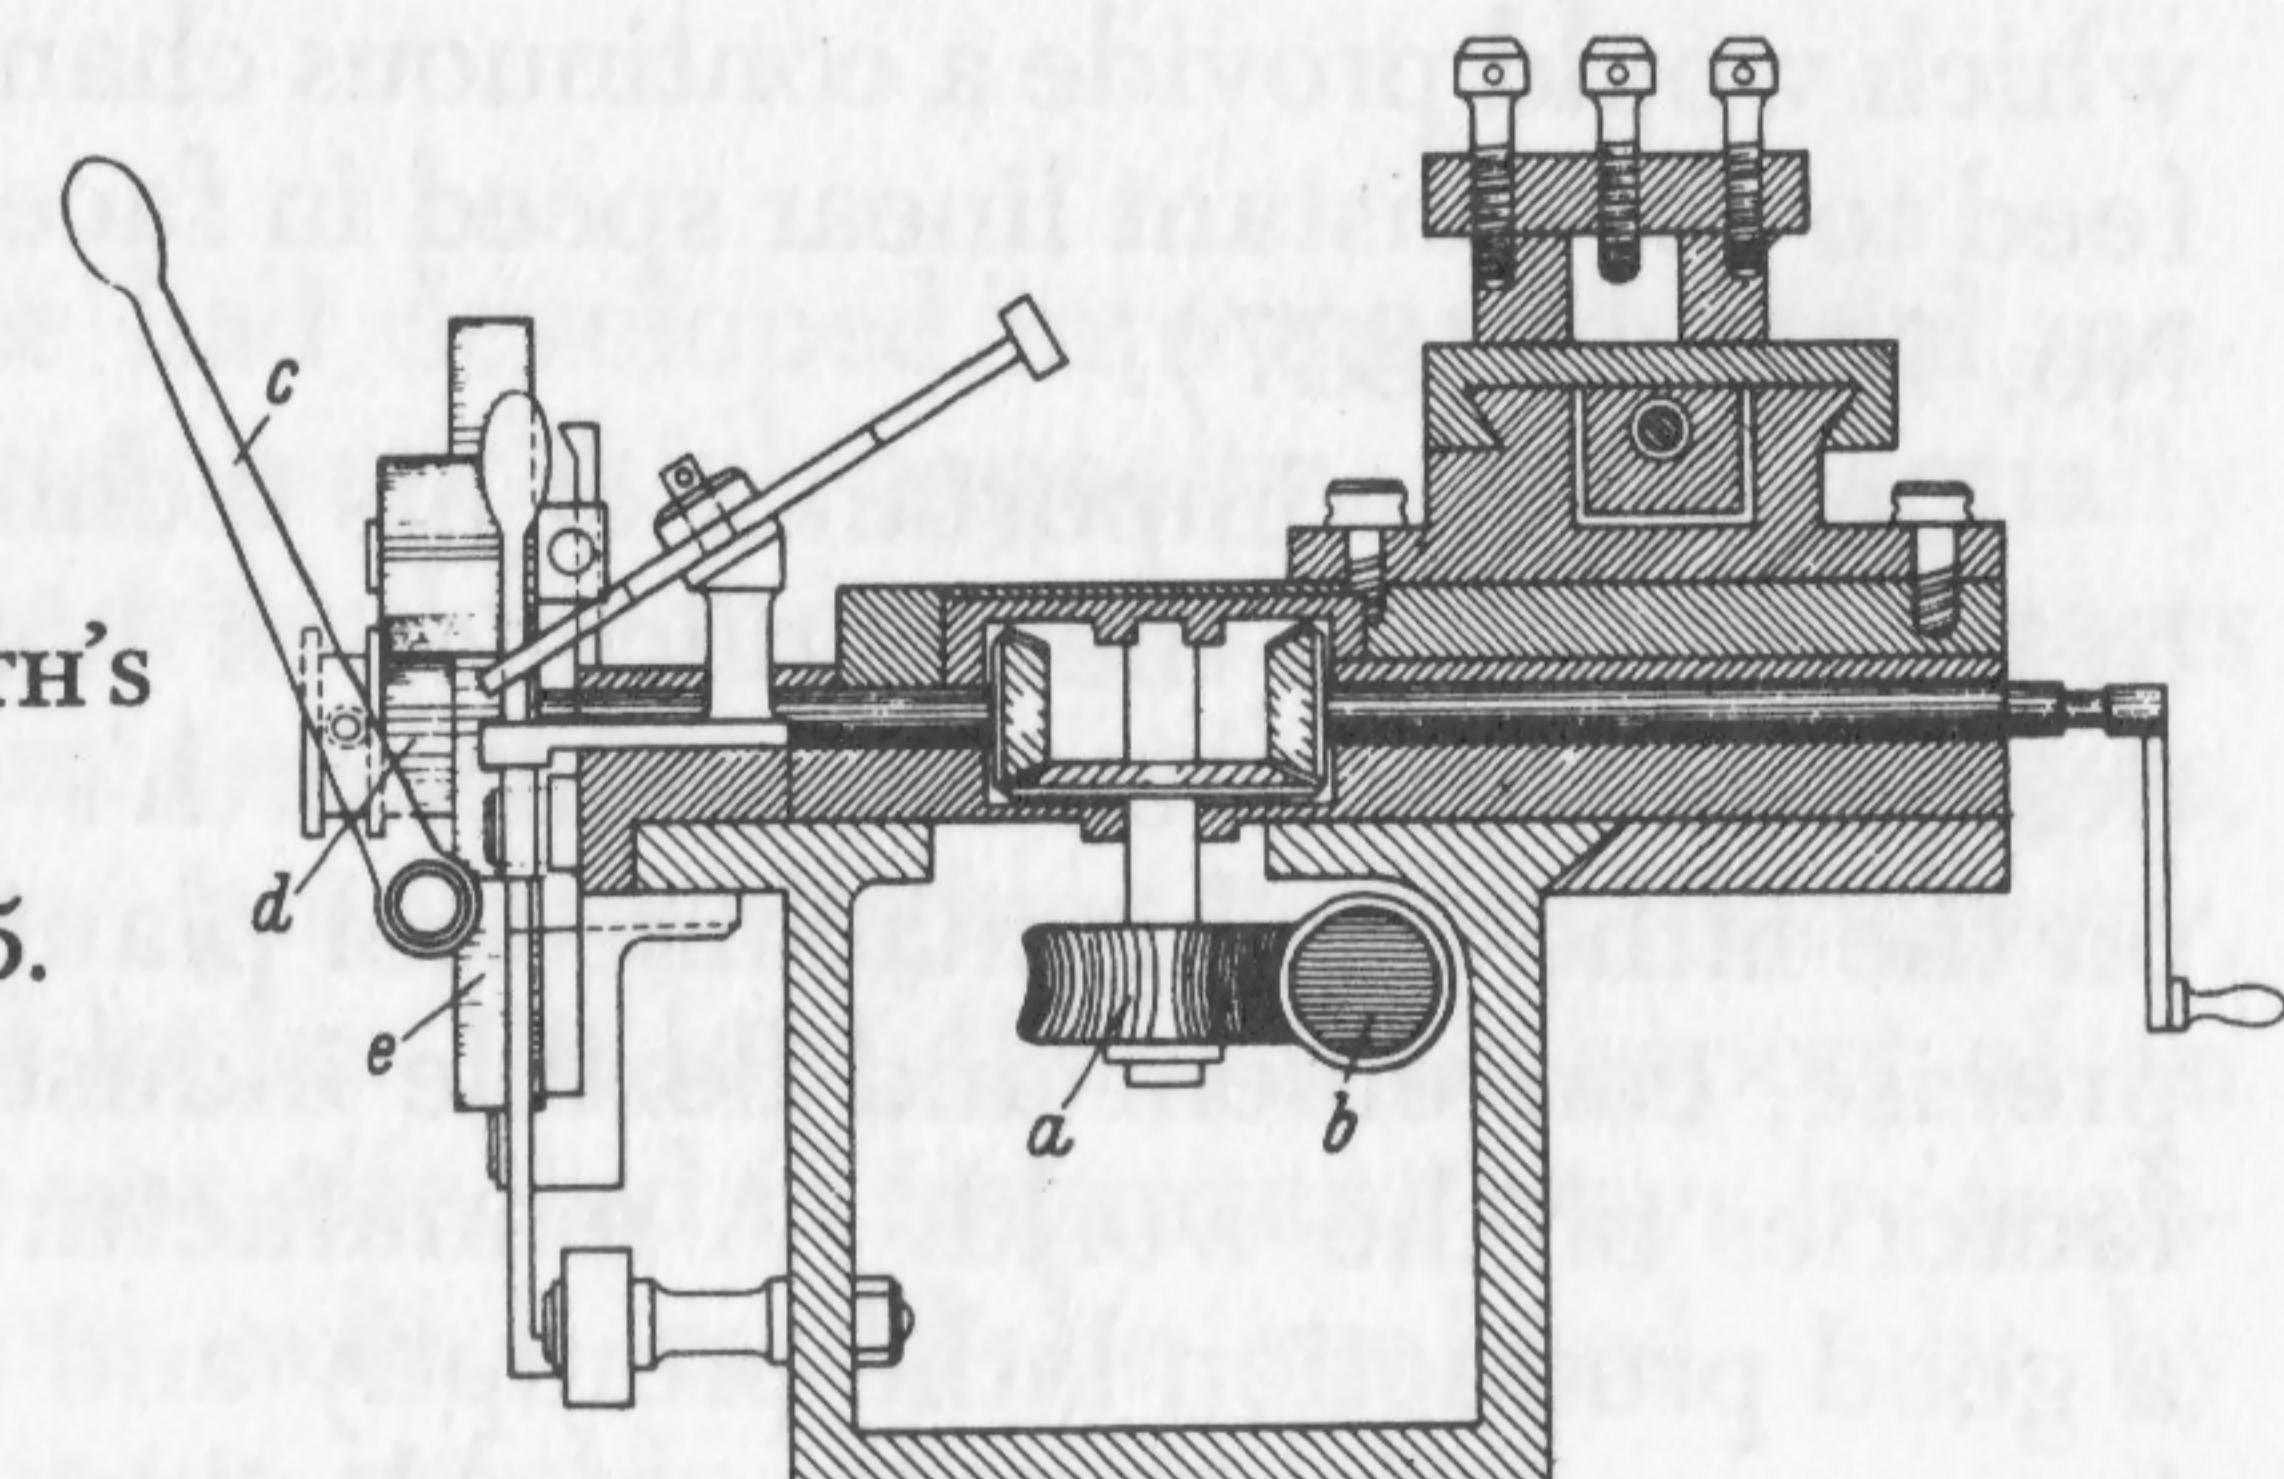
WHITWORTH'S LATHE FOR LONG WORKPIECES, 1839.
